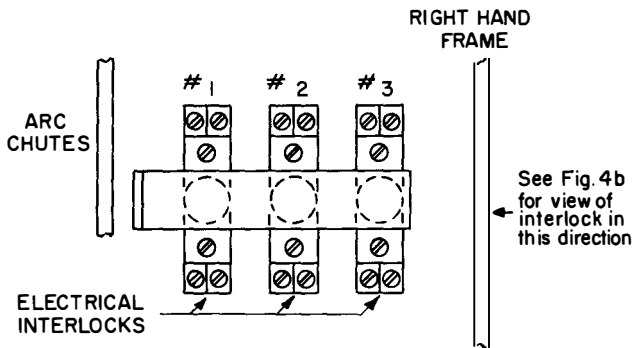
View from front of contactor showing electrical interlock arrangement.
